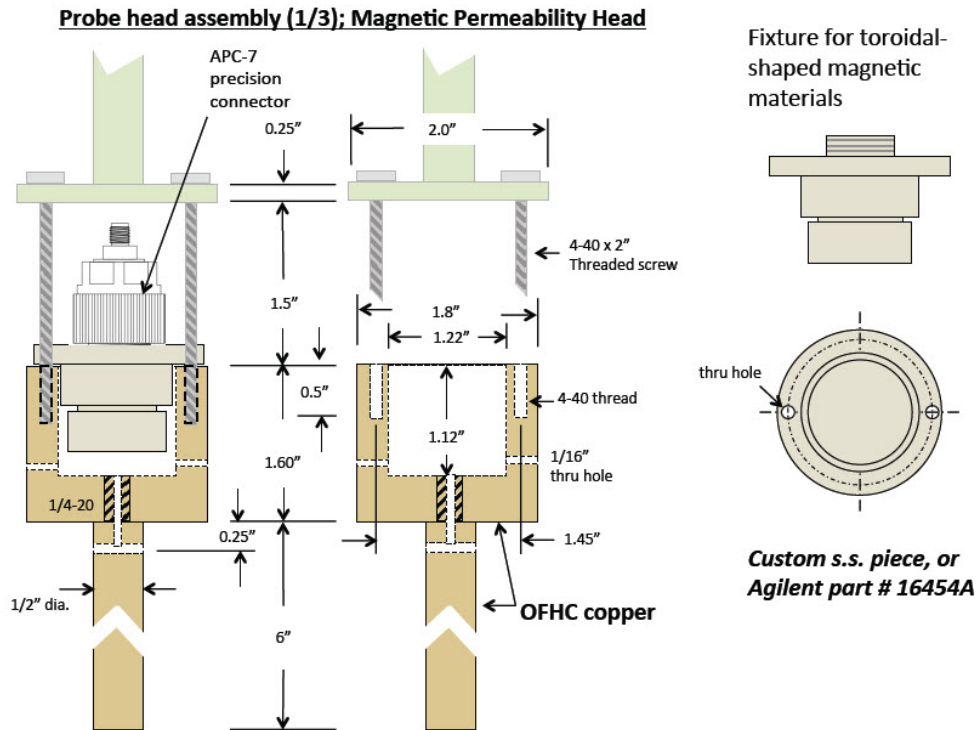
Further details of the RF probe dimensions. Also shown are the dimensions of the bottom copper piece and location of the magnetic permeability probe test head.
